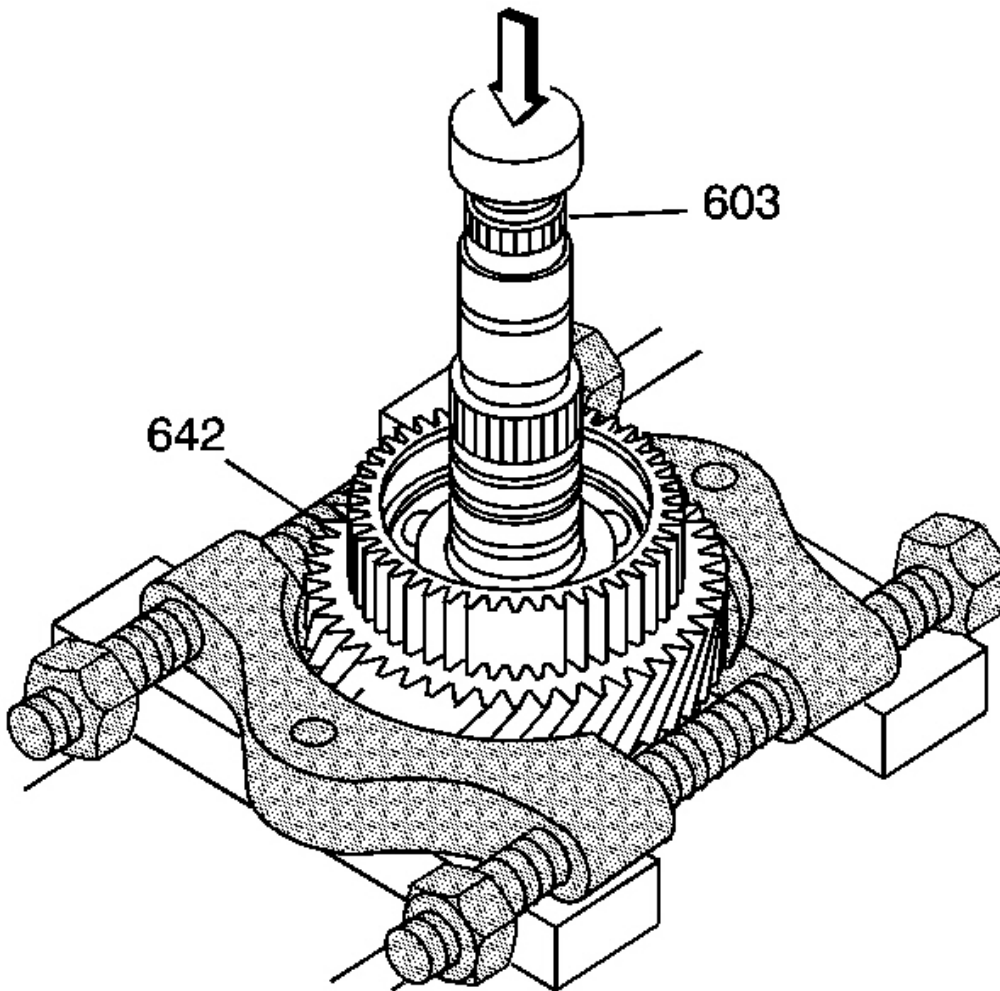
4th Drive Gear With Clutch Hub Assembly & Mainshaft
